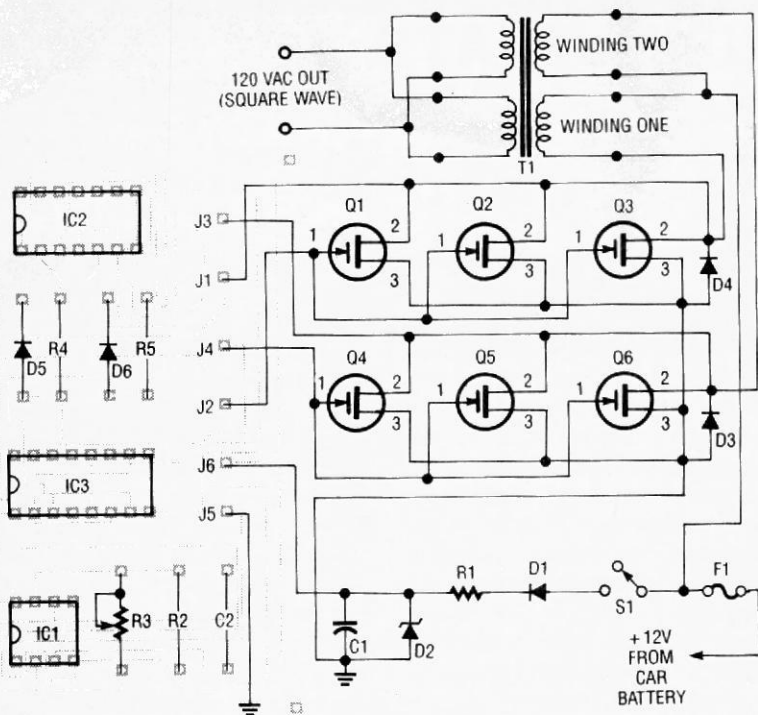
MOST OF THE COMPONENTS mount on a small PC board. The off-board components can be mounted on a terminal strip or perforated construction board.
